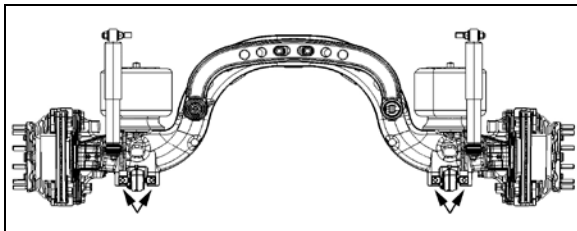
JACKING POINTS ON TAG AXLE 11029
